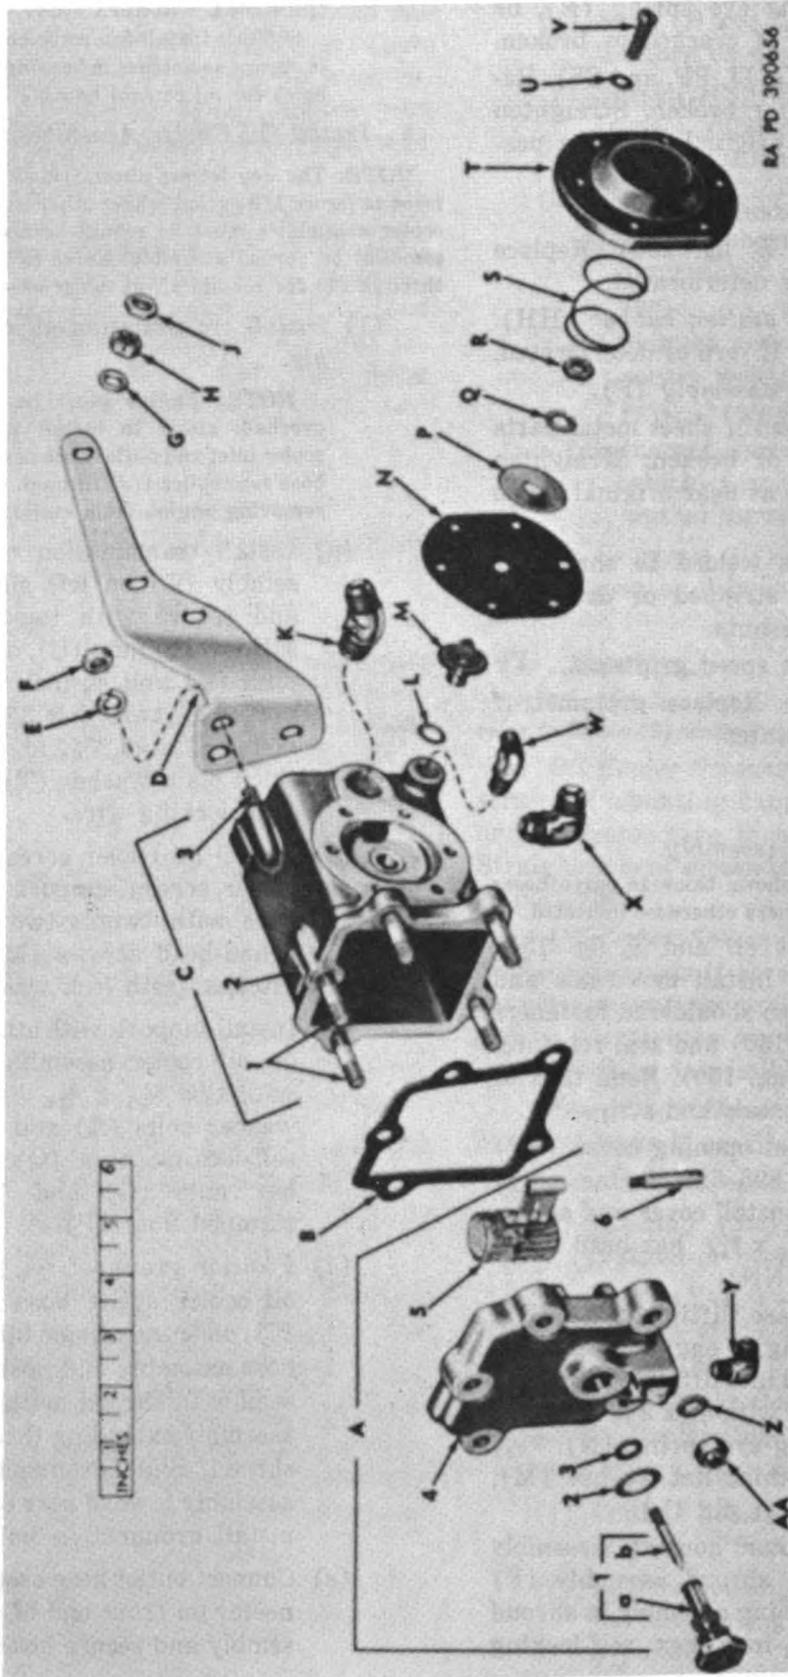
Fuel vapor separator assembly, elbows, and mounting bracket—exploded view.
